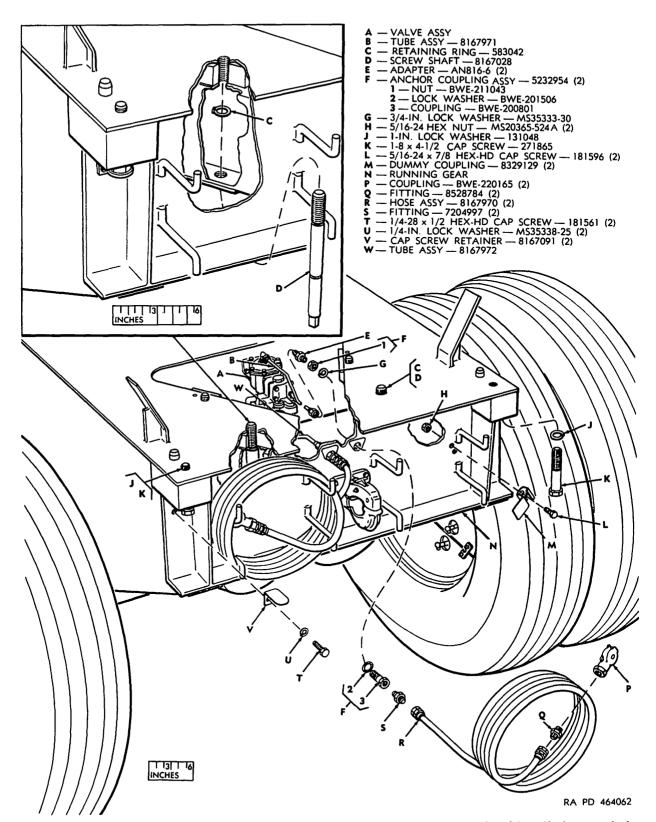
Anchor coupling, dummy coupling, cap screw, and screw shaft - removal and installation - typical.
